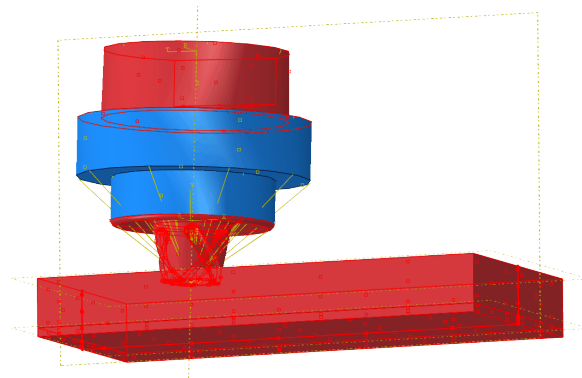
Areas defined for heat conduction (red) and convection (blue) on tool and workpieces.
